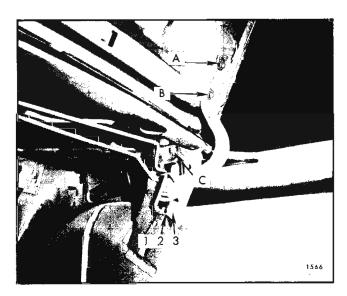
F8—Rear Compartment Lid Hinge and Torque Rod Attachment
